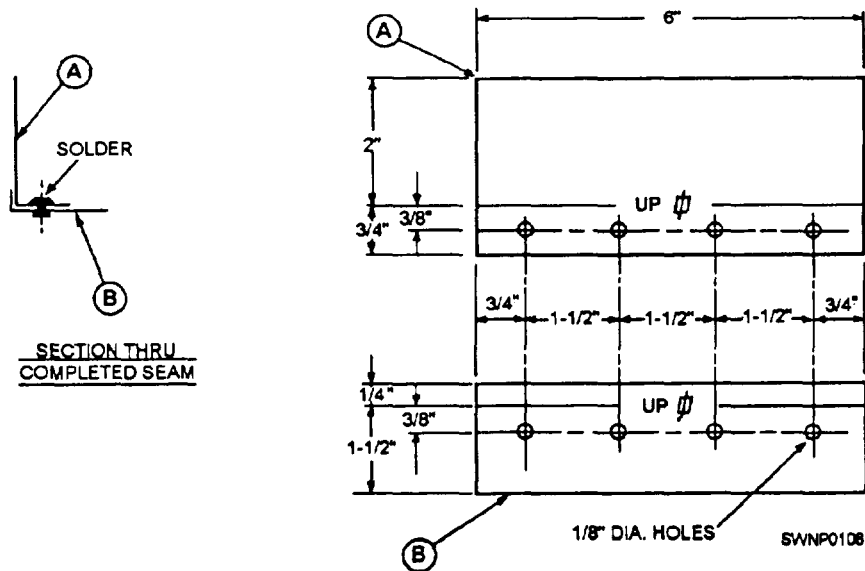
Riveted seam for tapped and riveted corner seam.
